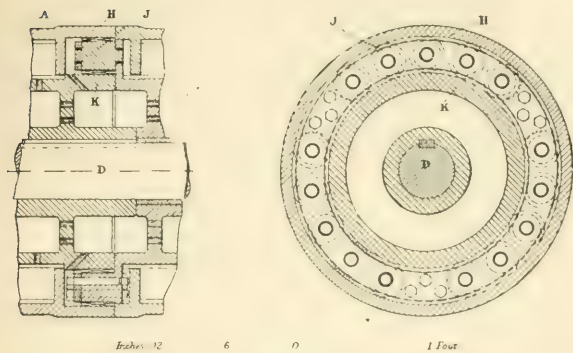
EPICYCLIC GEAR FOR REVERSING CLUTCH SHOWN IN FIG. 4.
